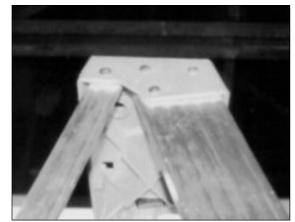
Exemplar Ladder – Two Rivets at the Failed Rivet Location
